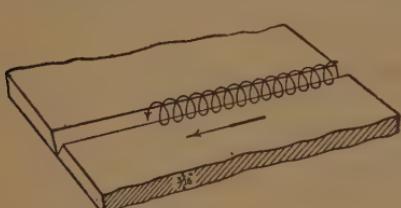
Circular Motion of Blowpipe for Welding Light Sections
